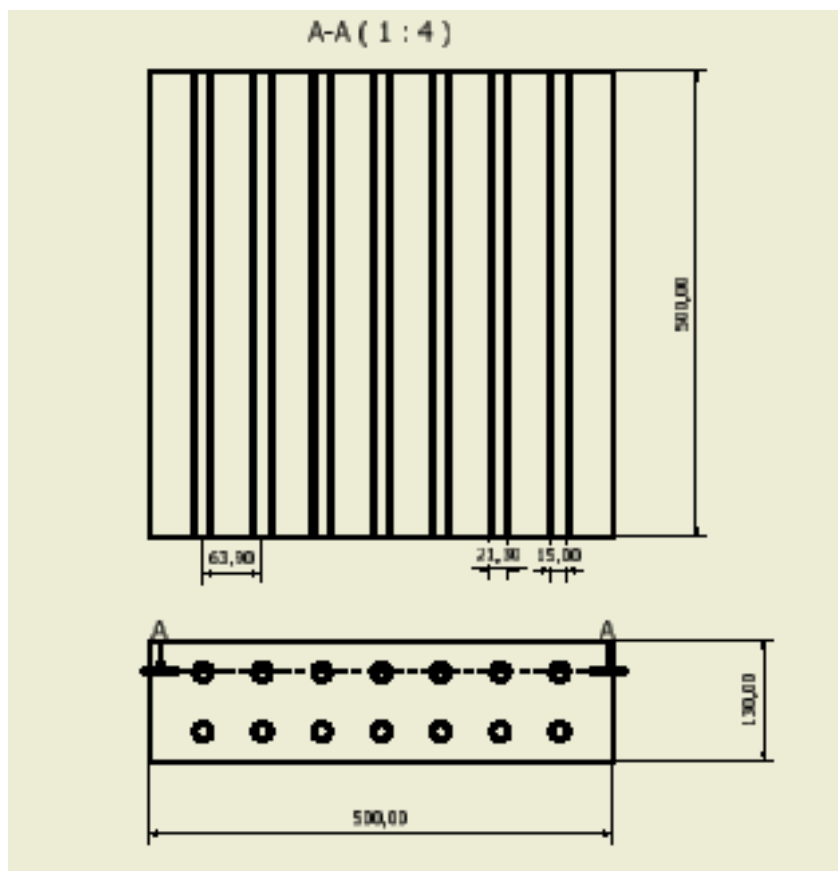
Drawing of the tube heat exchanger. ([23])
